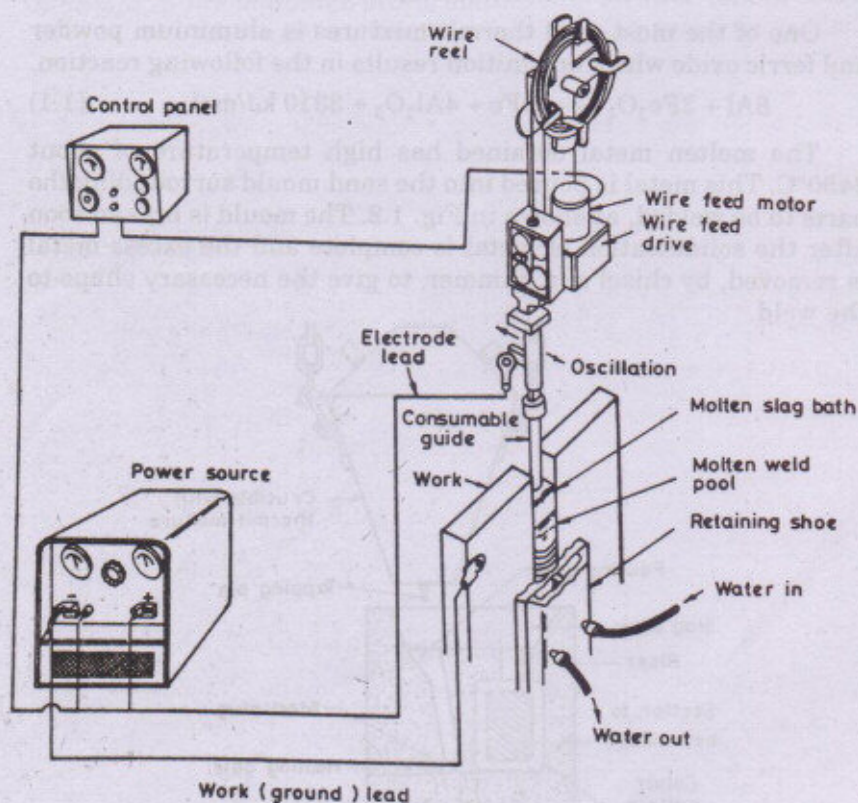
A set-up for consumable-guide electroslag welding.
